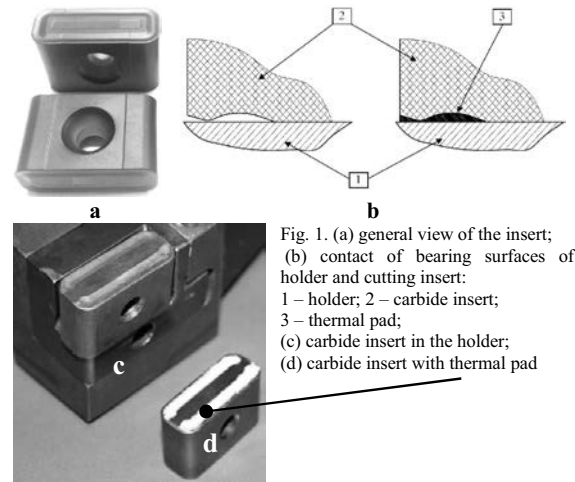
(a) general view of the insert; (b) contact of bearing surfaces of holder and cutting insert: 1 – holder; 2 – carbide insert; 3 – thermal pad; (c) carbide insert in the holder; (d) carbide insert with thermal pad
